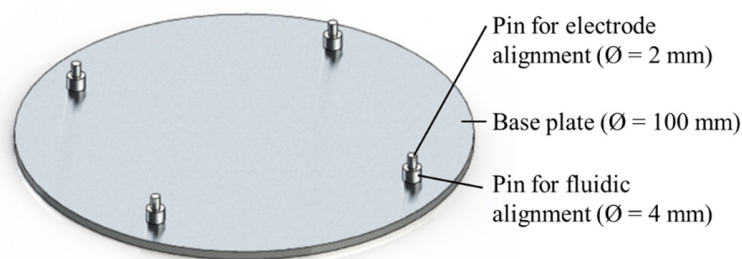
Schematic of custom-made alignment holder for aligning entire cell filtration assembly and SLM assembly.
